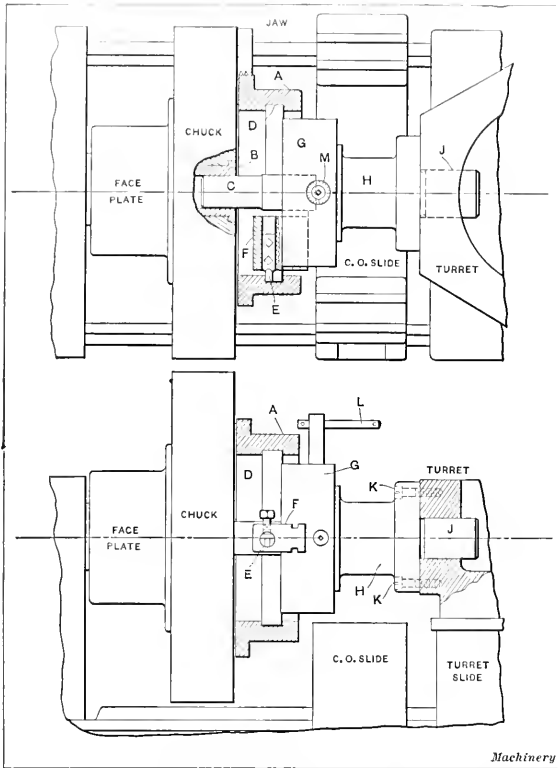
A Recessing Tool for a Large Collar, used in a Turret Lathe
